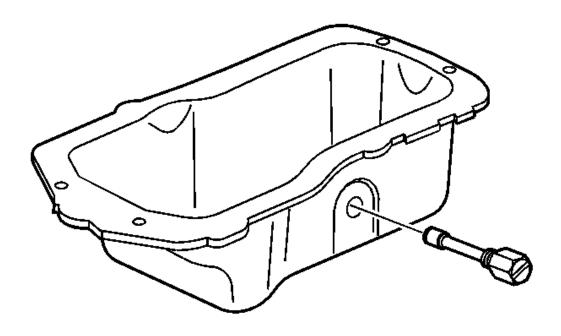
Oil Pan & Oil Level Sensor Courtesy of GENERAL MOTORS CORP.
